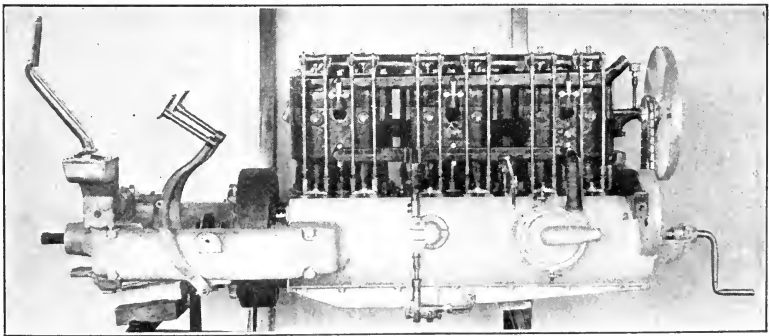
Six-Cylinder Unit Power Plant Utilized in Knox Motor Car is Supported by Four Points.
